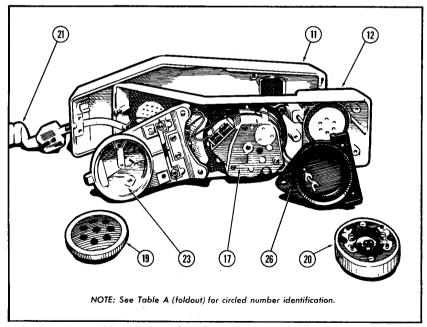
Parts of Handset Assembly NE-H1Q Type
